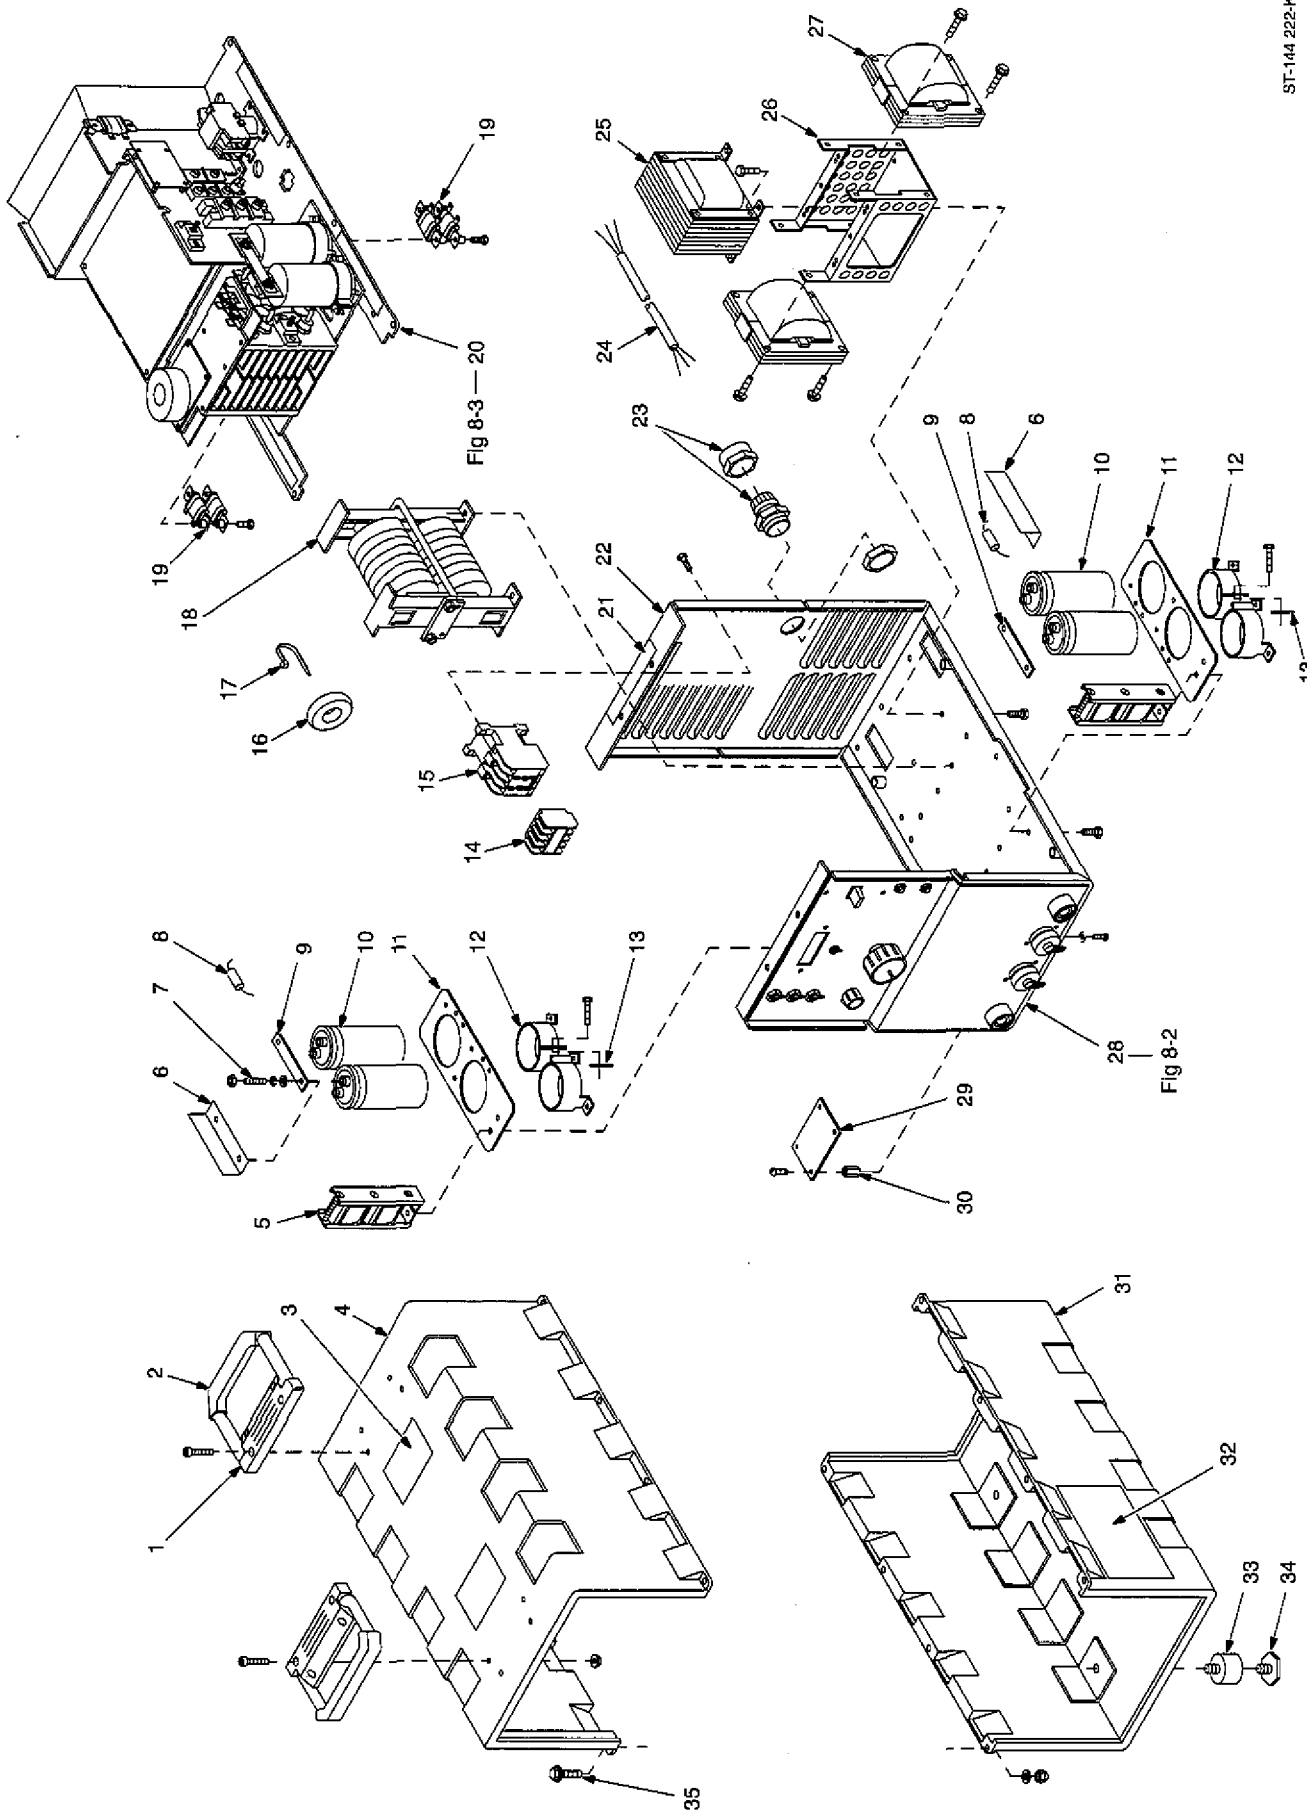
Main Assembly (208-230/460V Model Illustrated)
